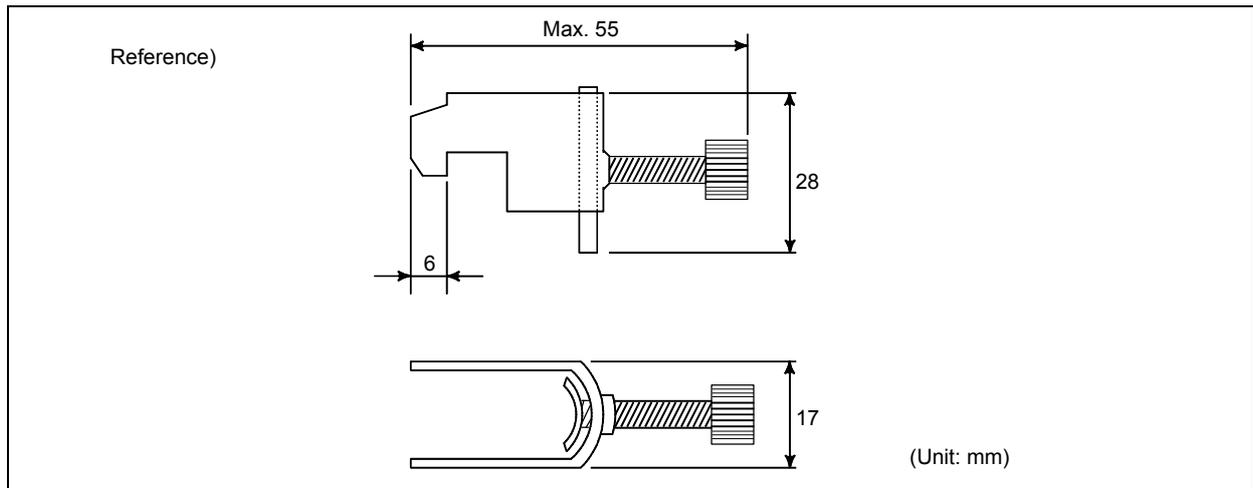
(e) Clamping metal fixture (outline drawing)
